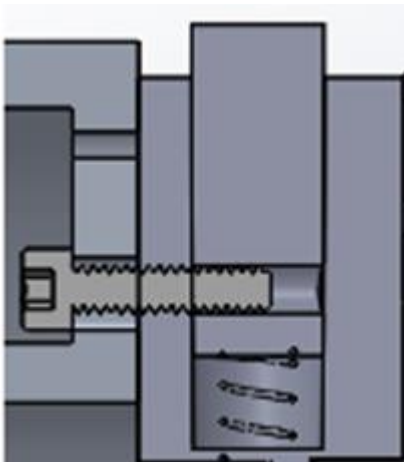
CAD Model Side View of Quick-Lock Mechanism
